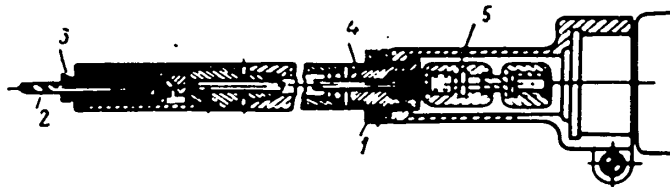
Extension Fitting of Type SNP-4, Attached to Hand Drill
